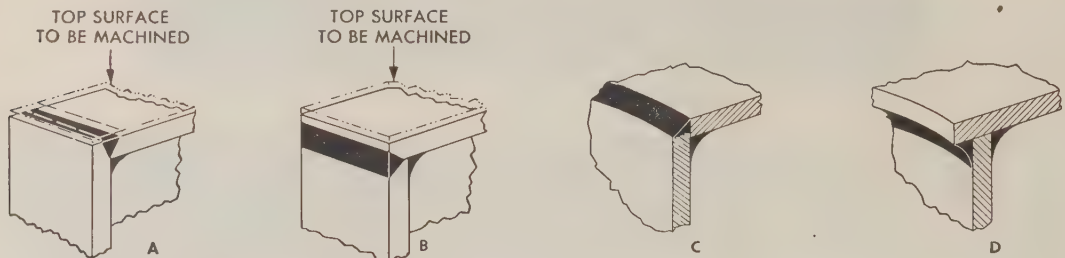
TYPES OF WELDED JOINTS WHICH DESERVE DESIGN CONSIDERATION
